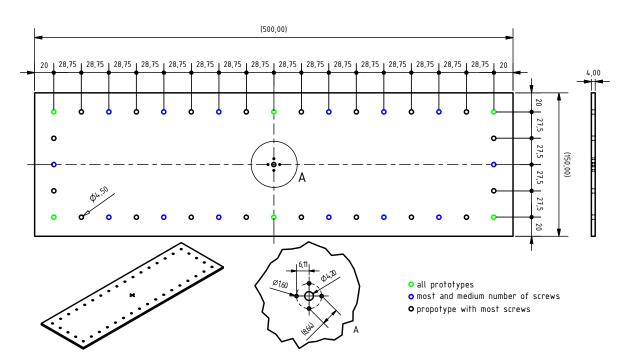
Technical drawing of the exchangeable cavity bases. All dimensions are in millimeter.
